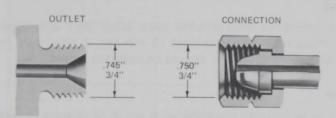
CONNECTION 290 .745"-14 LH EXT. accepting a Bullet
